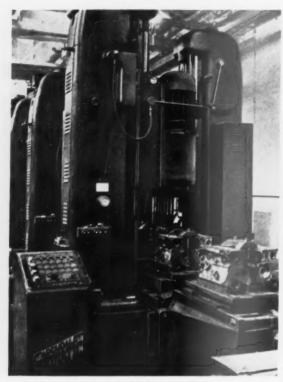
Archdale nine-station in-line transfer machine for semifinish and finish machining the cylinder bores
